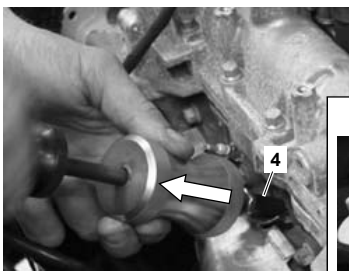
Extracting the glow plug tube using slide hammer puller (accessory).
